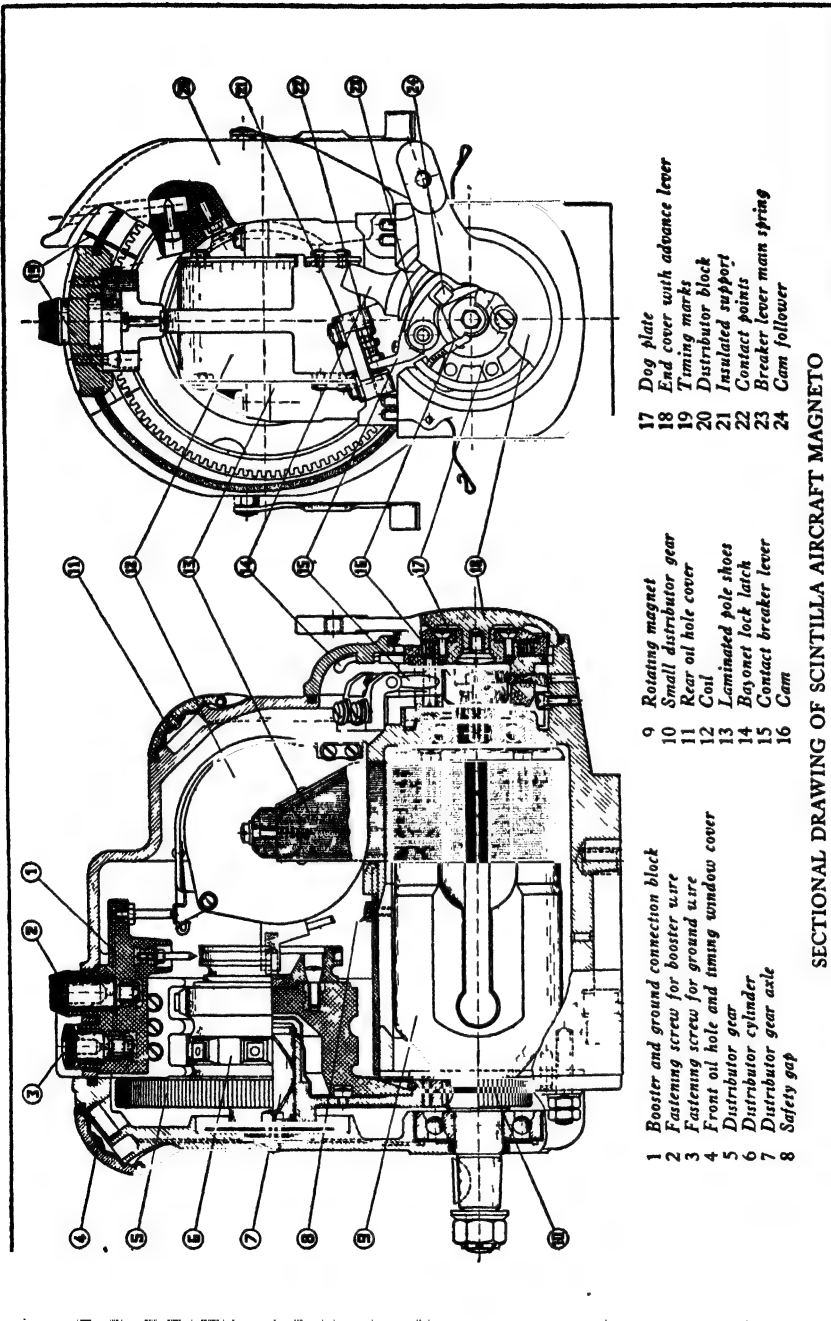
Sectional Drawing of Scintilla Aircraft Magneto Showing all Important Parts.
